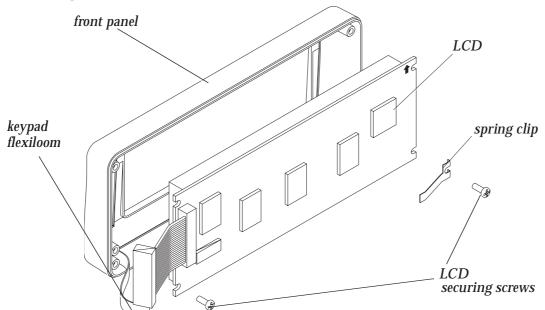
Separating the LCD from the Front Panel - Internal View of Front Assembly
